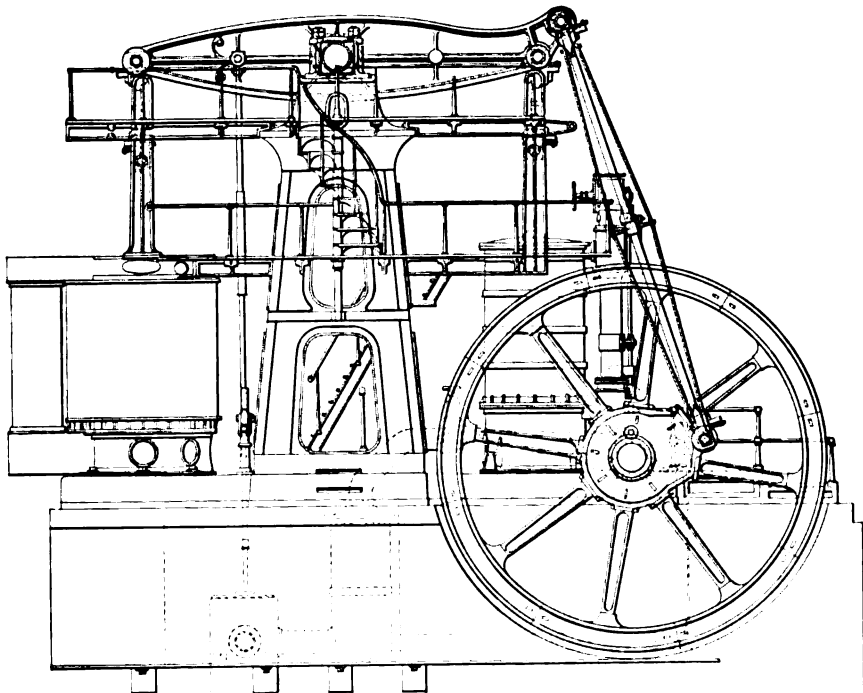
A BEAM BLOWING ENGINE, BUILT BY THE WM. CRAMP & SONS SHIP AND ENGINE BUILDING CO., PHILADELPHIA.
